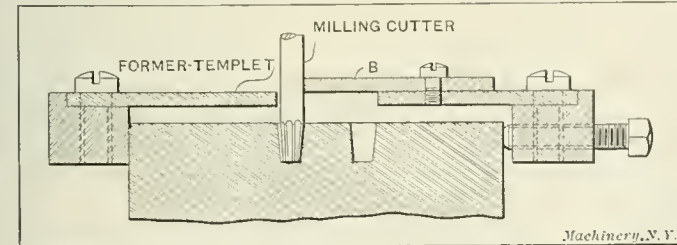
Sectional View of Drop-forging Die, showing Application of Templets
